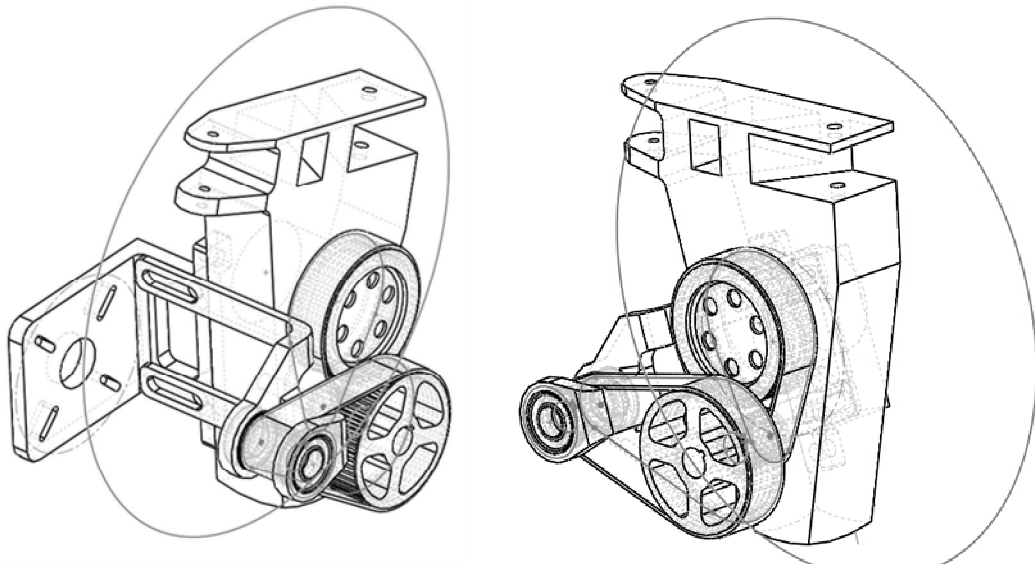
Introduce two stage pulley system – belt tension operates further from face of upright so introduces larger bending moment to motor mounting structure.
